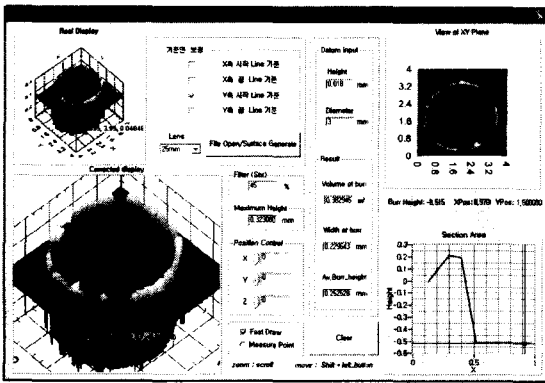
Measurement of Burr in Drilling $\phi 3$ Hole
